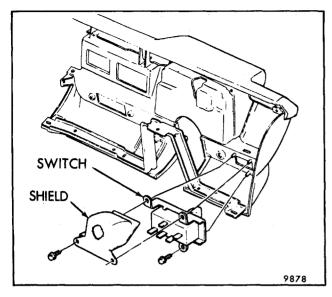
Windshield Wiper Switch Installation - Chevrolet Monza
